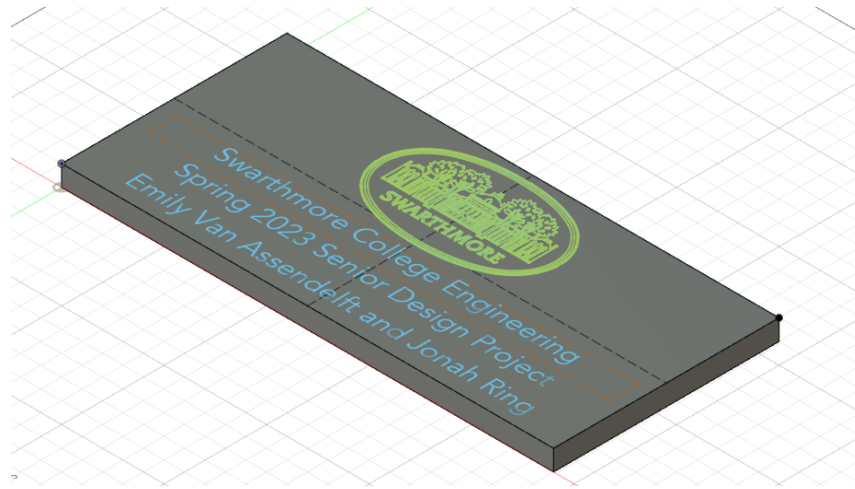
Plaque design view from Fusion 360; the laser-engraved plaque will be affixed to the finished boardwalk
